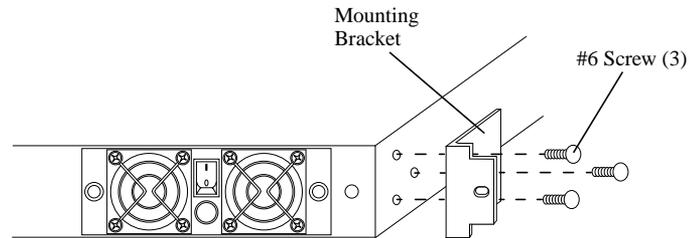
Attaching the Mounting Brackets to the Front of the RM610
